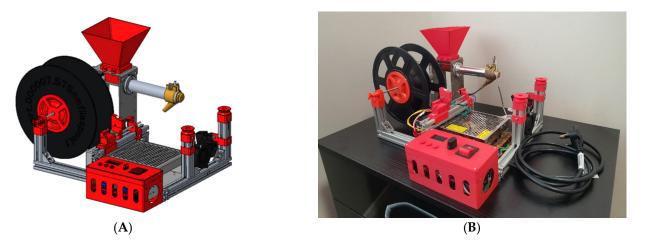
(A) Final concept assembly. (B) The prototype of the 3D printer filament-recycling machine.
